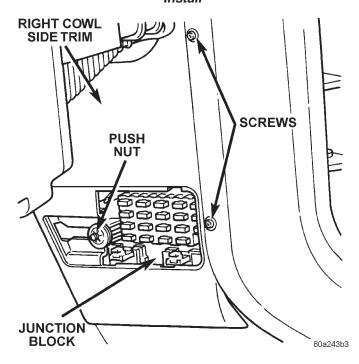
Right Cowl Side Trim Panel Remove/Install
